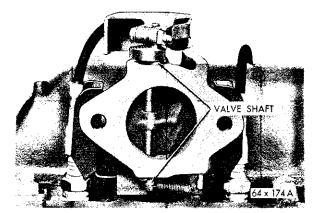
Manifold Heat Control Valve (383 and 413 Cu. In. Engine)
